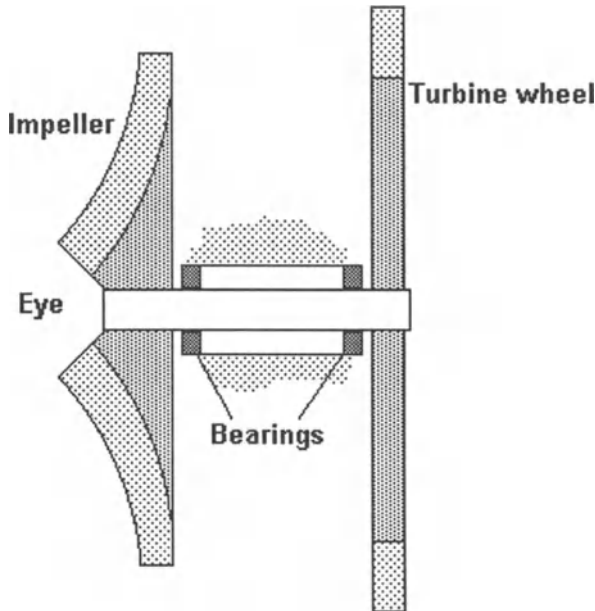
Rotating parts of a simple turbocompressor. Vanes on the impeller compress air entering at the eye of the compressor. Hot exhaust gas passes from nozzles through vanes on the turbine wheel, where they give up sufficient energy to drive the assembly.
